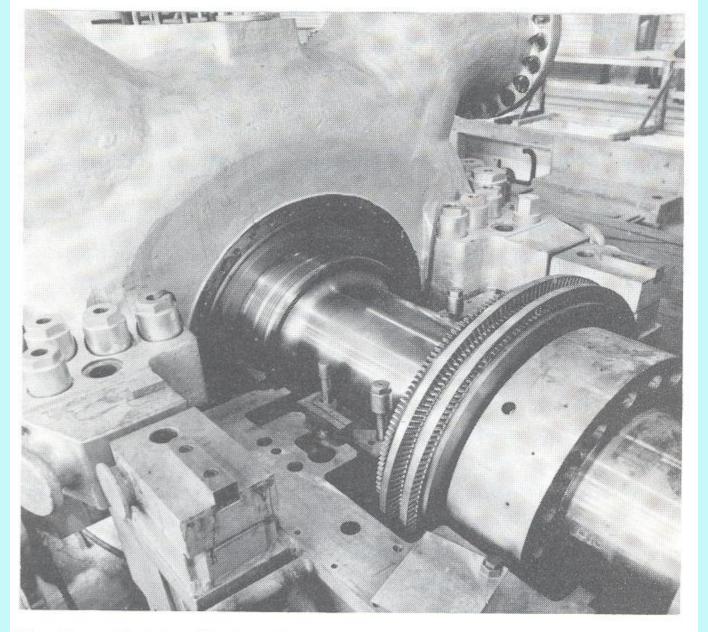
Turbine Shaft in Position in Lower Bearing Shell
